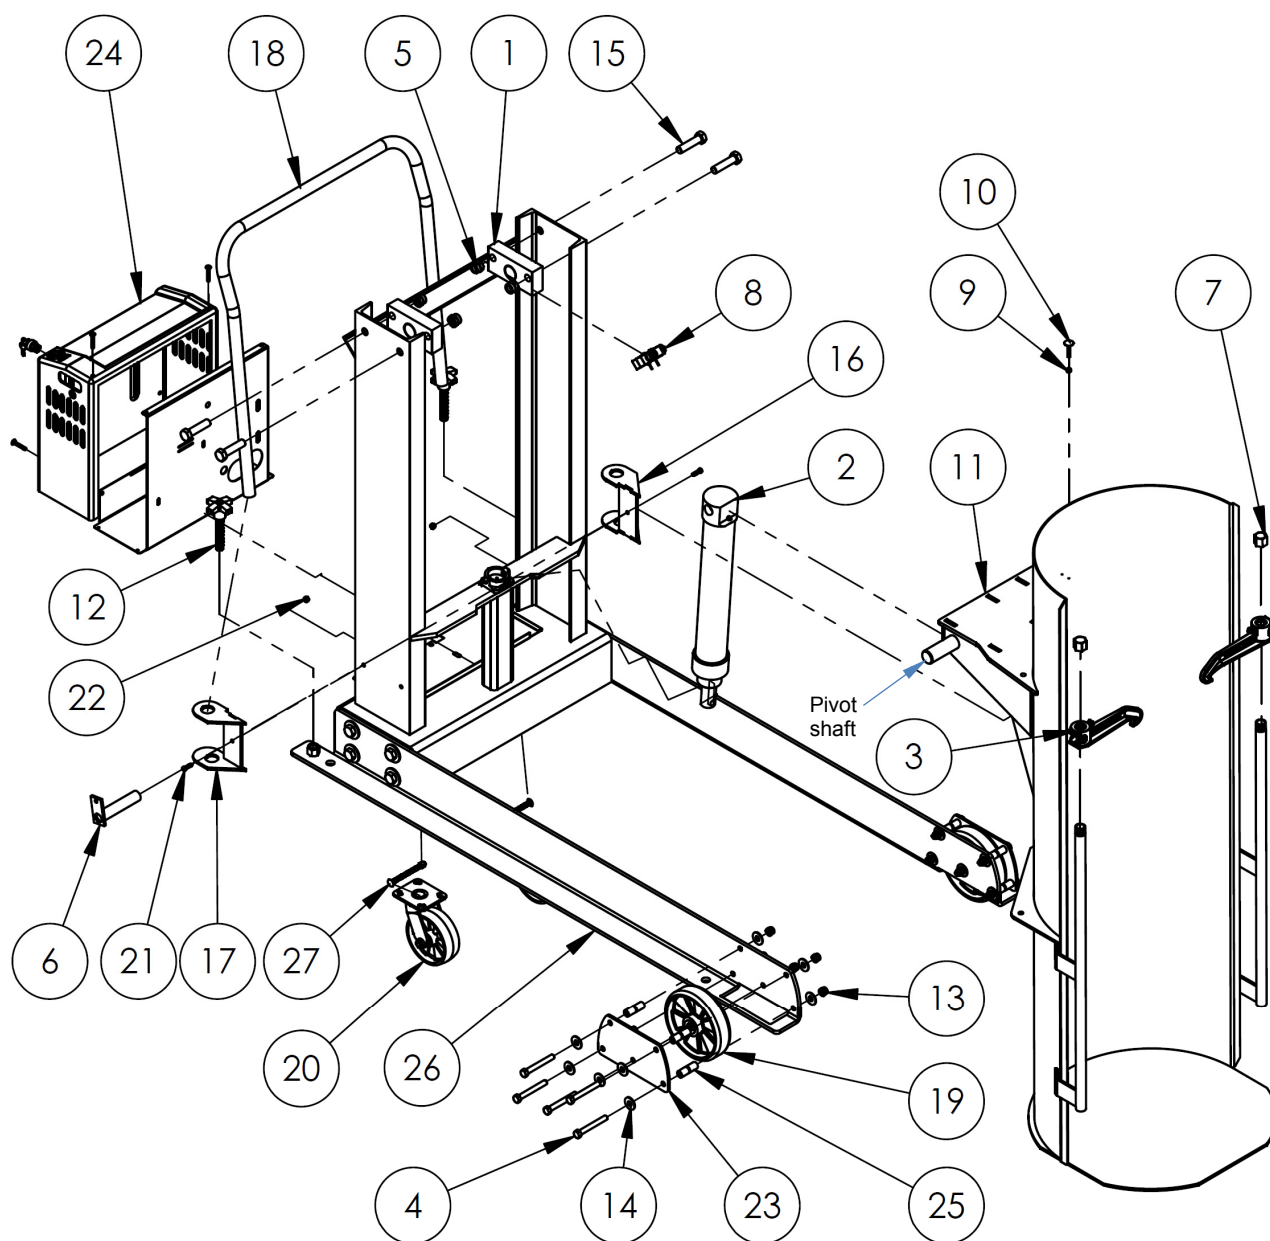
HDD-72-S series stationary dumpers exploded parts diagram and bill of materials
